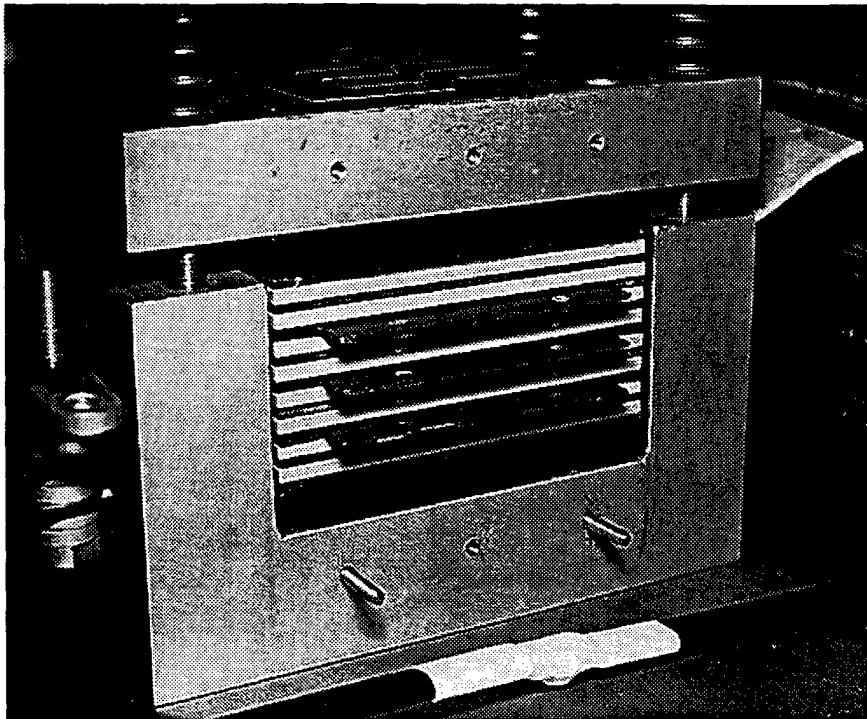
Diamond MCM Cooling Fins protruding from 3-D Stack
